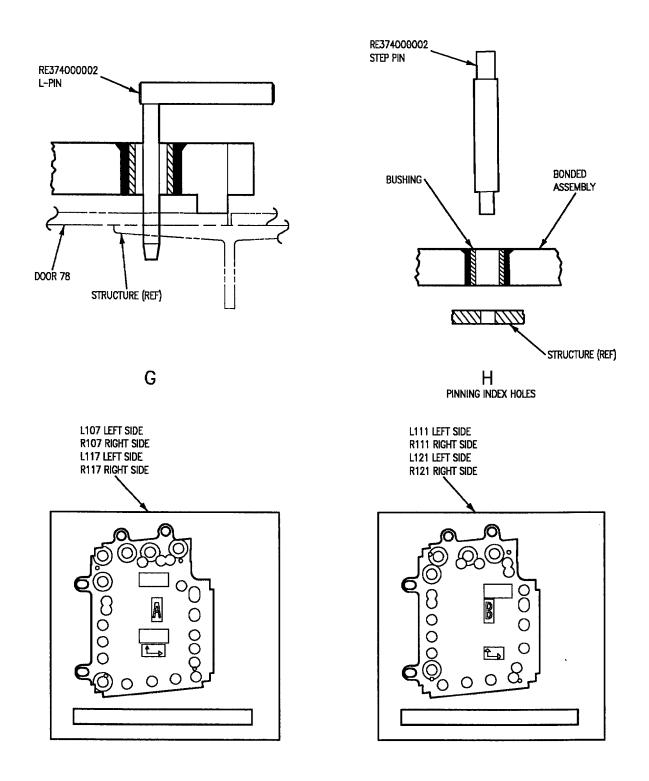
Installation of Plate Set for Drilling Door 78 and Substructure (Sheet 4)
